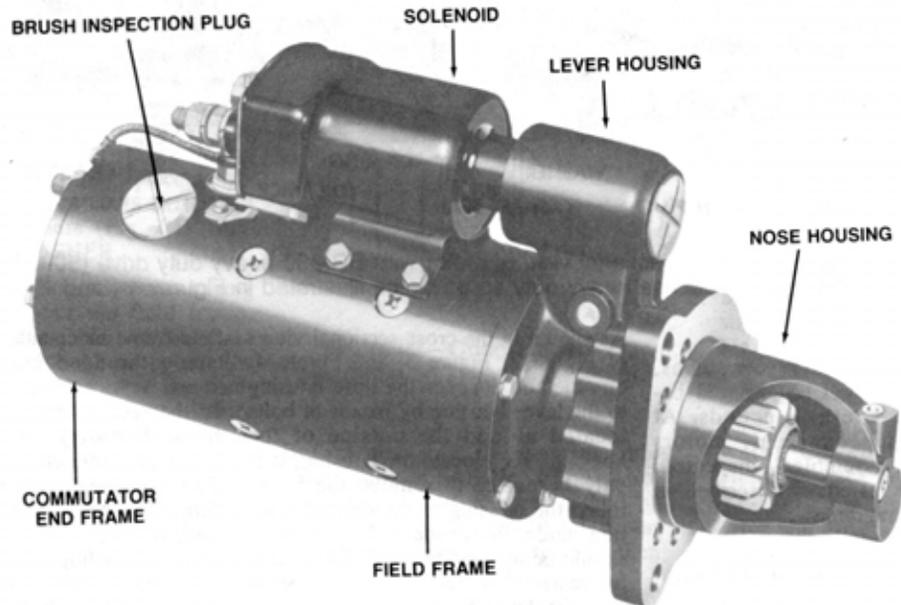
Typical 50-MT Series heavy duty cranking motor.
